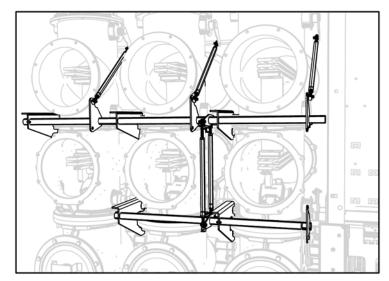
Mounting position of kinematic system at the upper and lower busbar housings
